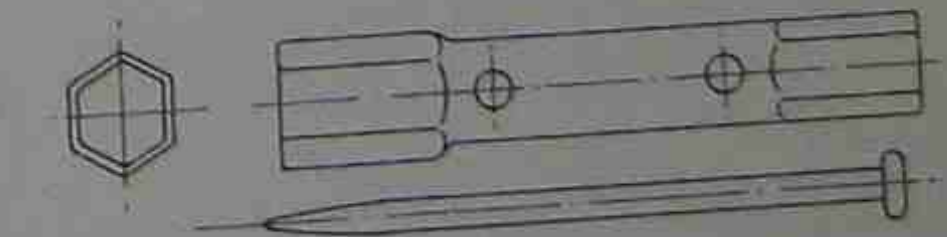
Tubular box spanner (socket wrench) and tommy bar
